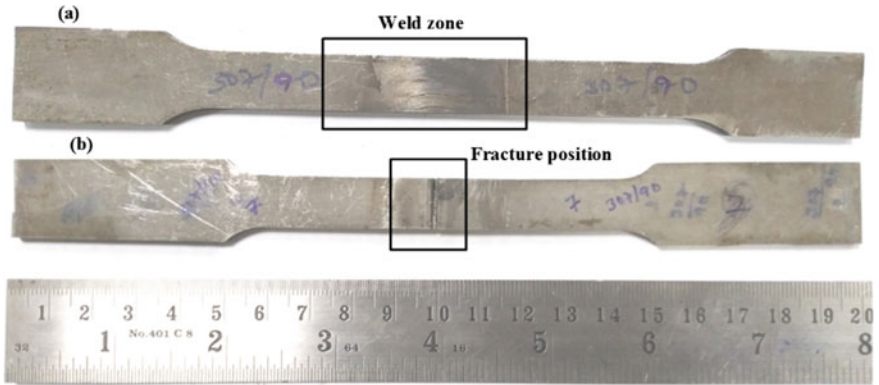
Top view of a welded specimen and b fractured specimen subjected to tensile tests
